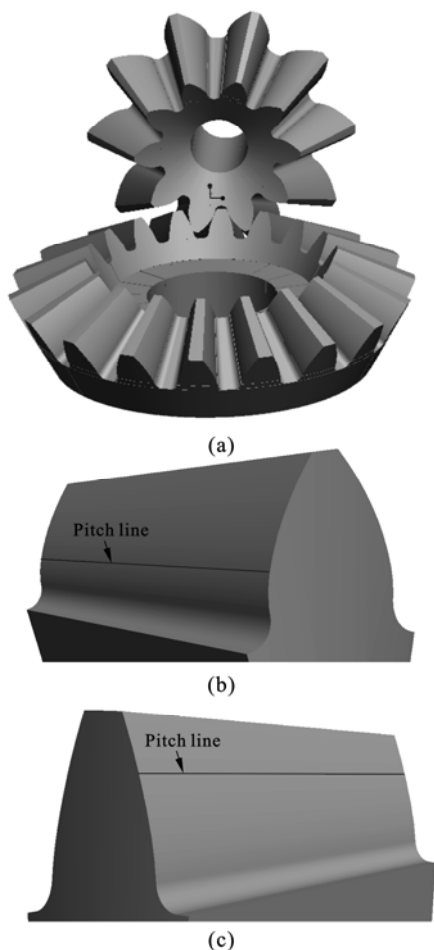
Illustration of generated full 3D straight bevel gears' geometry and their assembly (a), pitch line on tooth surface of driving pinion (b), and pitch line on tooth surface of driven gear (c)
